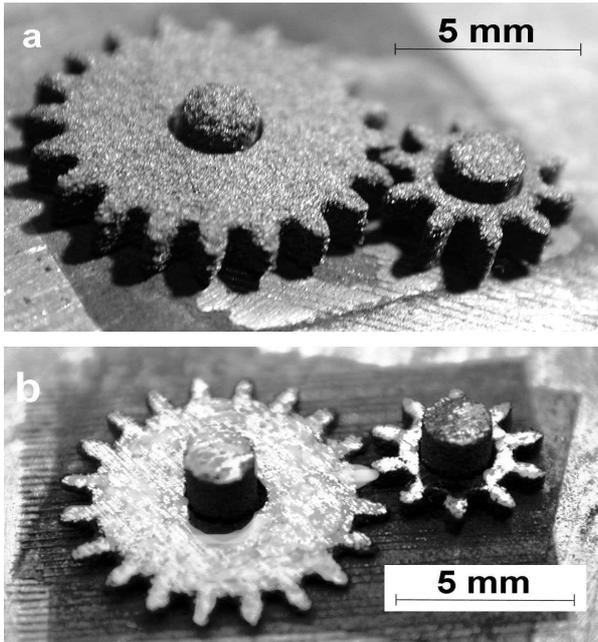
laser micro sintered gear wheels (steel 1.4404, normal atmosphere). b: gear after finishing.
